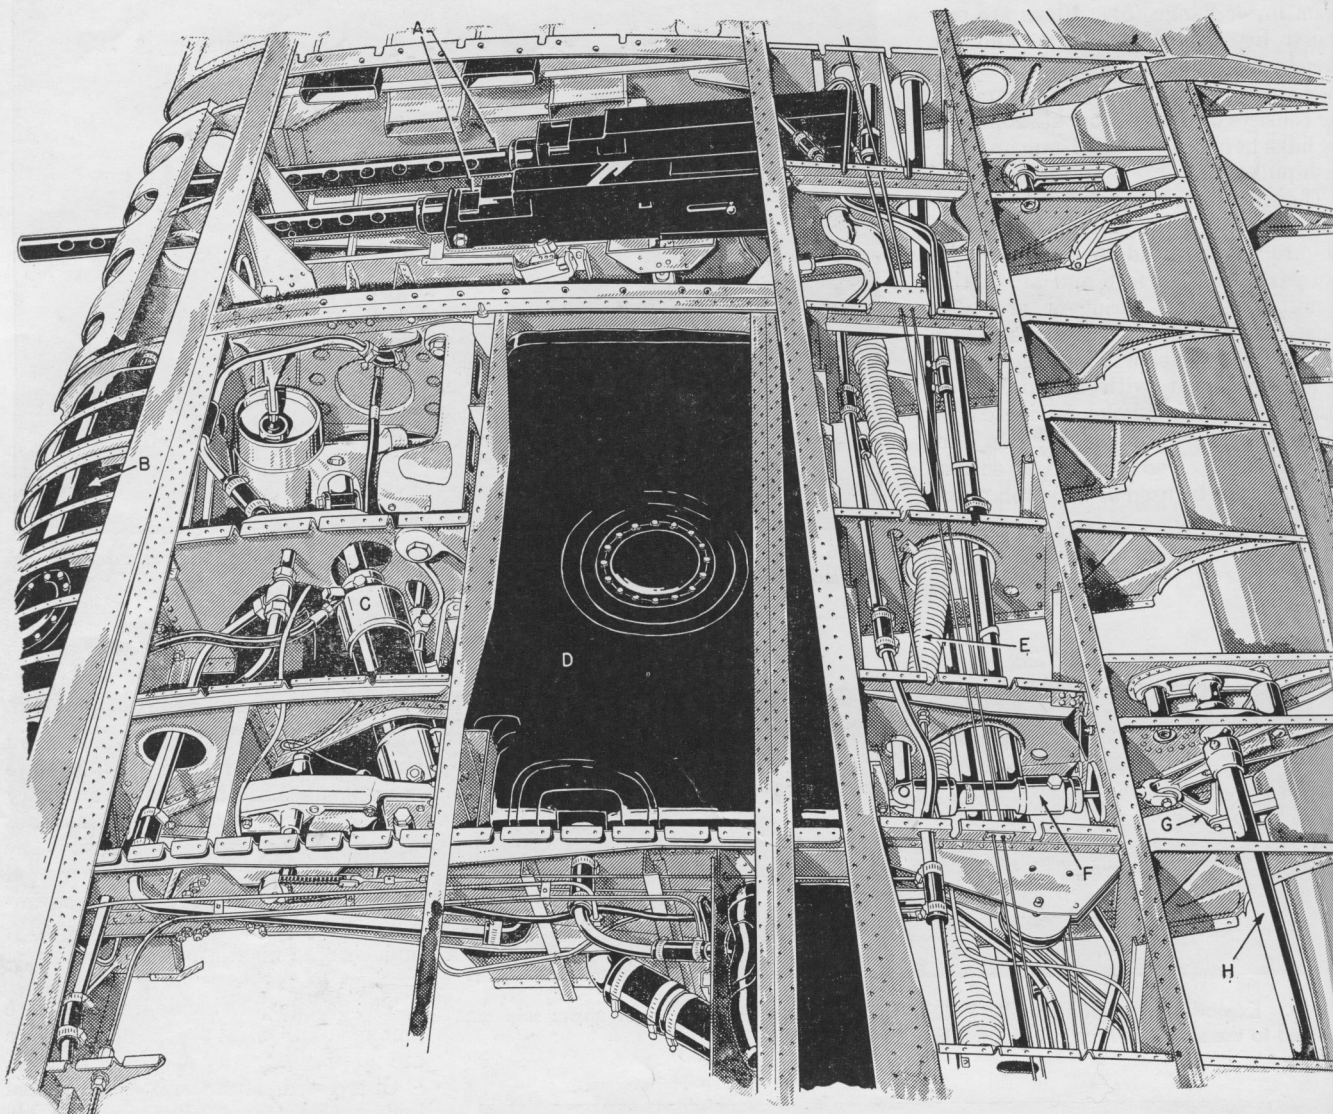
Right wing of the Thunderbolt with the top skin removed to show (A) the installation of two of four .50-caliber machine guns; (B) L.E. fuel tank; (C) hydraulic landing gear retracting cylinder; (D) 29-gal self-sealing fuel tank; (E) gun heater tube; (F) hydraulic flap-actuating cylinder; (G) flap-actuating bell crank; (H) torque tube.
